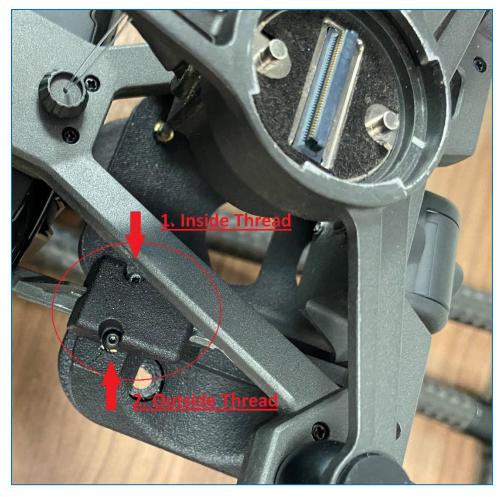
Bottom Mounting Bracket - View from Below Aircraft
